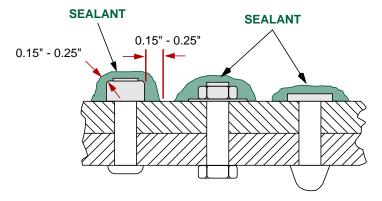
TYPICAL WET ASSEMBLY OF FASTENERS
